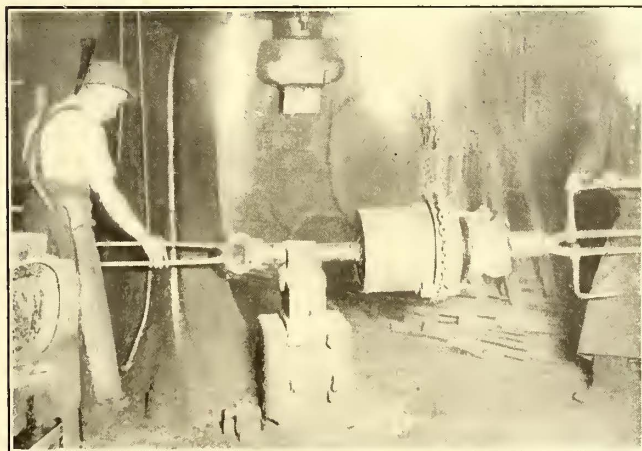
San Francisco Welding—Completing the Weld in a V-Block Under Steam Hammer
